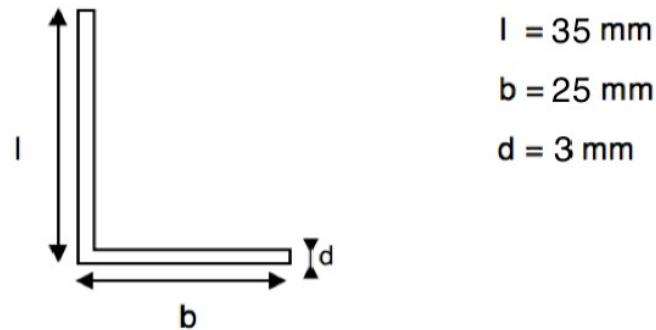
Dimensions of the aluminum fins 'L' section (8)
